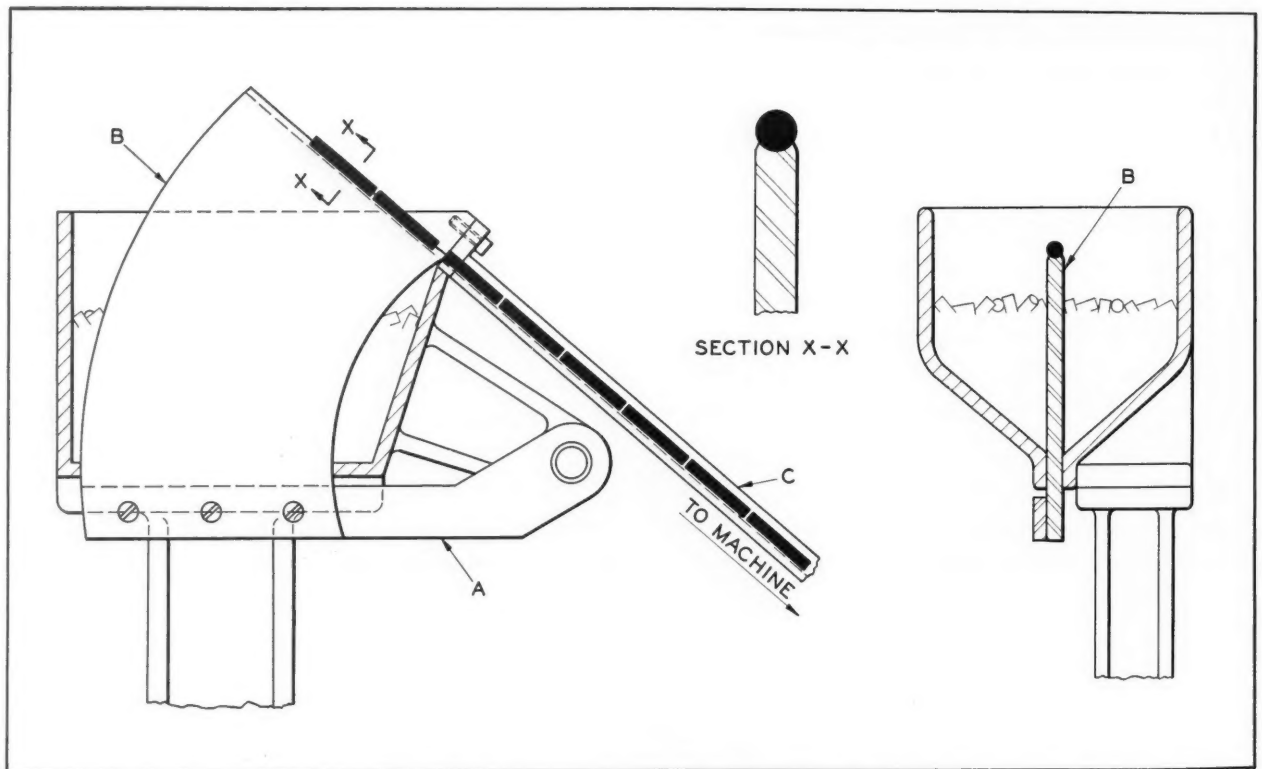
Centerboard hopper often used for picking up rod-shaped work or parts of angular cross-section, depending upon the design of the blade
